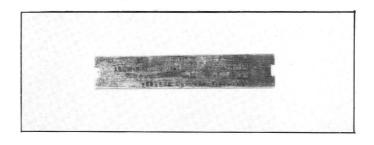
Gage, Hammer Nose  $Protrusion^1$
